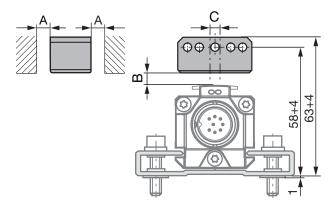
Dimensions and distances with BTL6-A-3801-2 magnet
